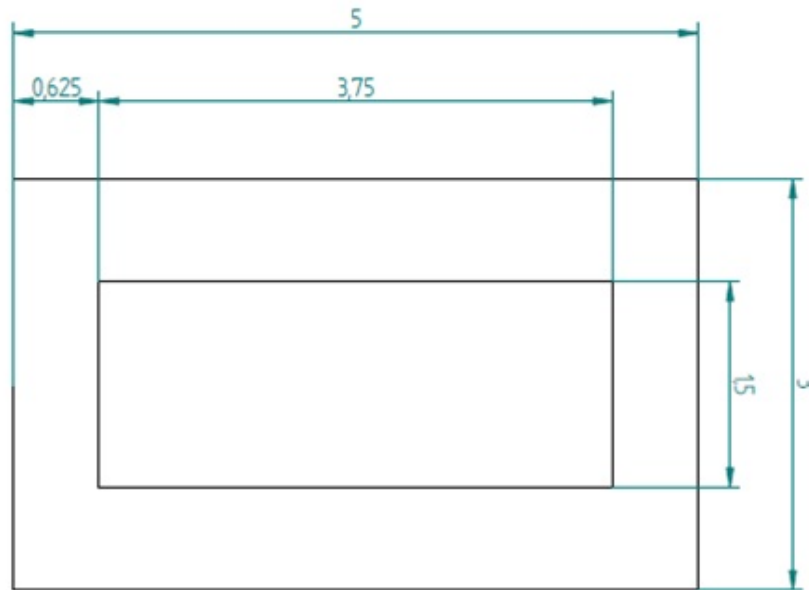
Drawing of $100\mu\text{m}$ spacer with dimensions shown in mm
